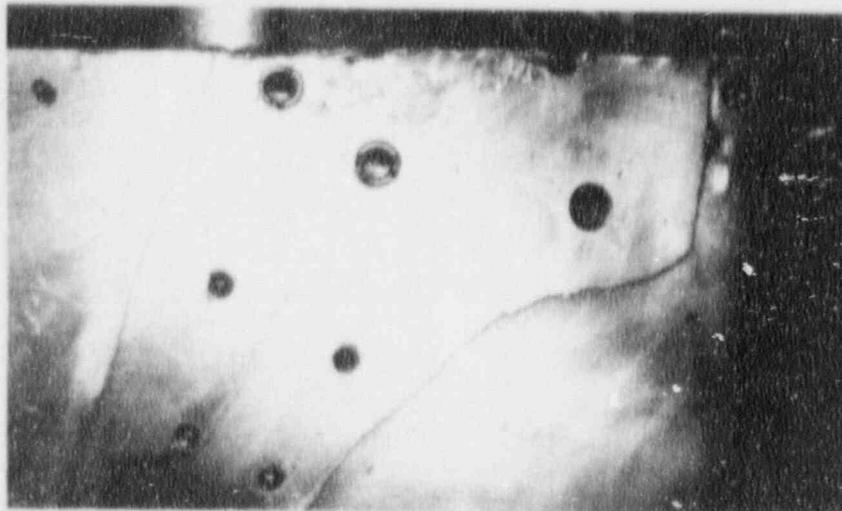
Side view of the left rear end sheet at the location of the stubshaft support bracket. Note, the deformation of metal cause by a hammering of the bracket against the end sheet, for a short time, after the bracket detached from the end sheet.
